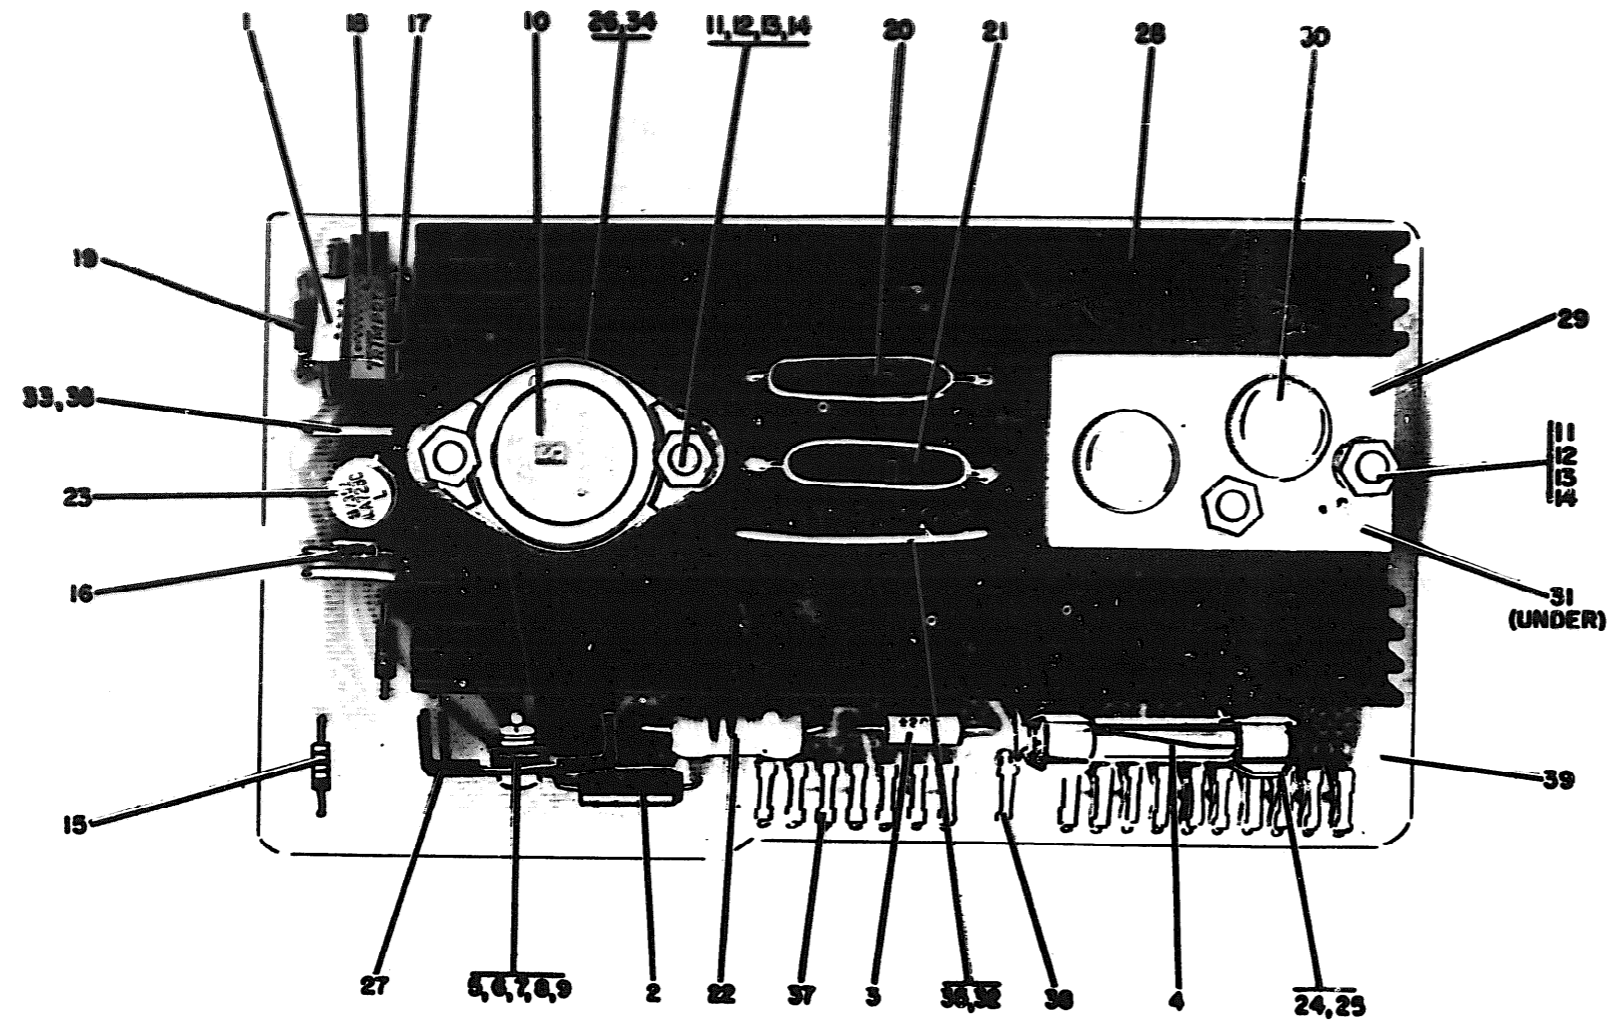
Circuit Card Assembly, +12V Rectifier and Regulator
